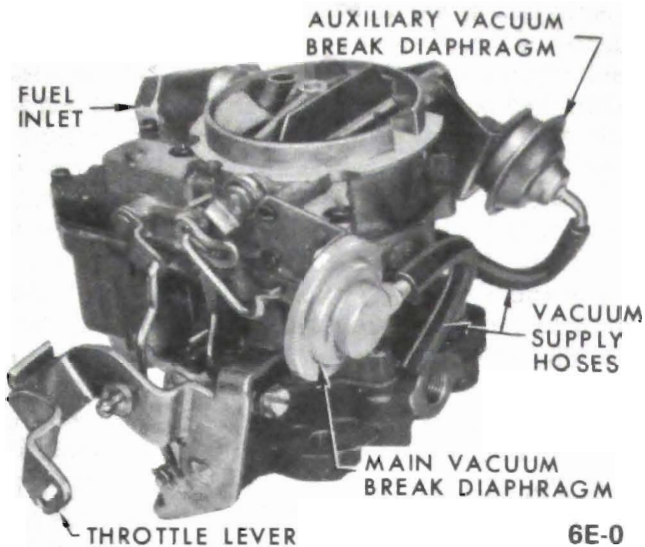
E-0 - Rochester 2GV Carburetor Assembly
